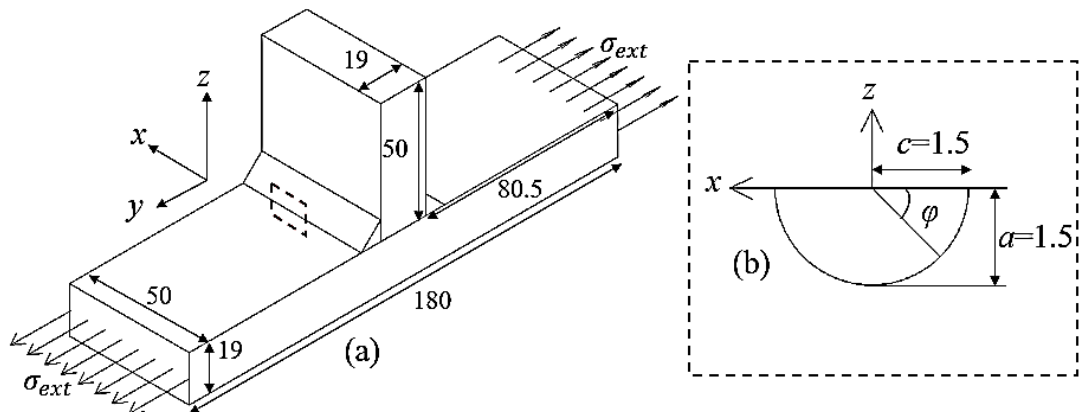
Geometric configuration of the welded joint model used in fracture mechanics analysis. (a) Geometry of the cracked body, and (b) Geometry of the crack face. (All dimensions are in millimeters.)
